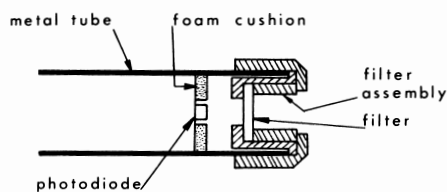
Cross-sectional view of the filter-probe assembly (not to scale).
